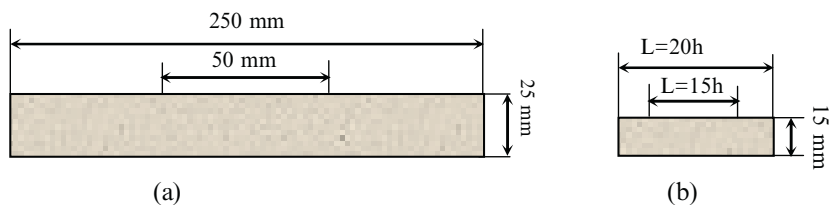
Specimen dimensions for: (a) tensile tests, (b) bending tests
